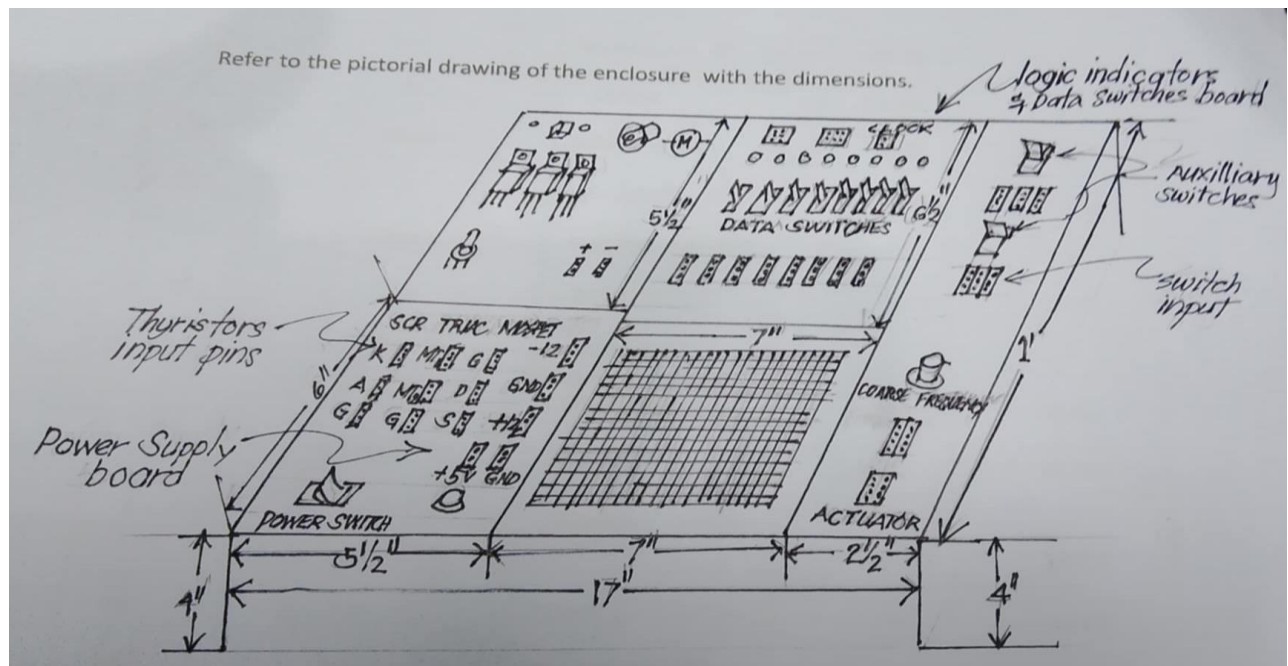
Dimensions of the aluminum framing of the Trainer and the divisions where circuits are mounted. The wirings are safely place at the bottom part of the enclosure.
